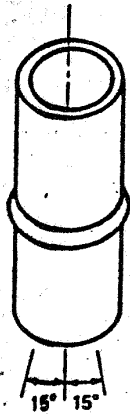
Positions of test plates for groove welds
